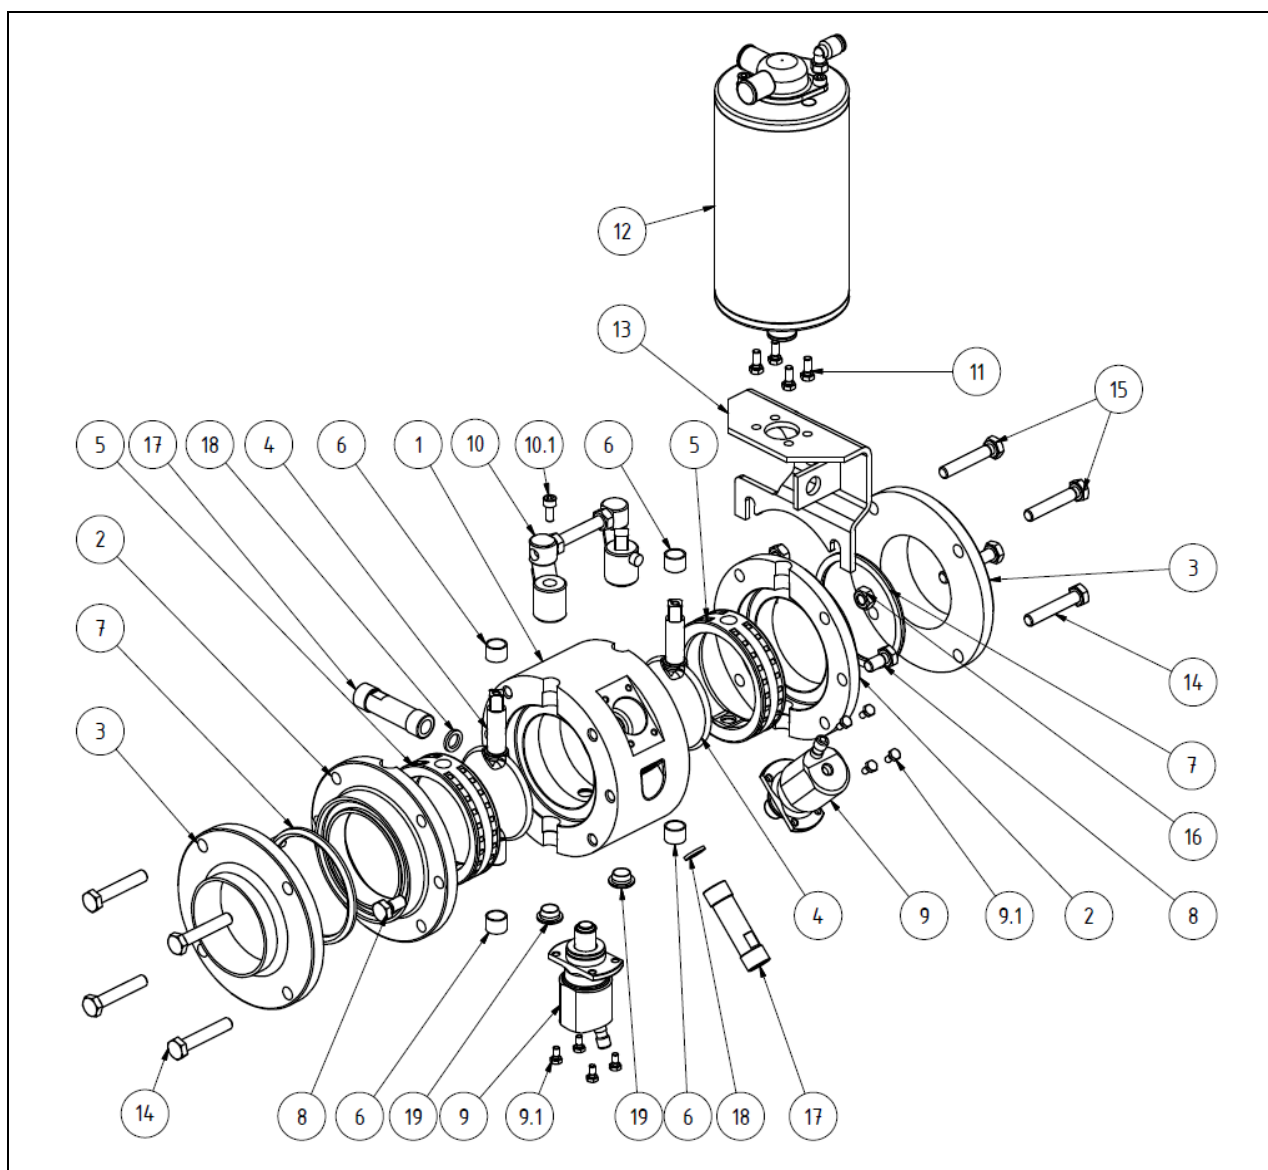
Structure of the Leakage Butterfly Valve with pneum. Actuator
